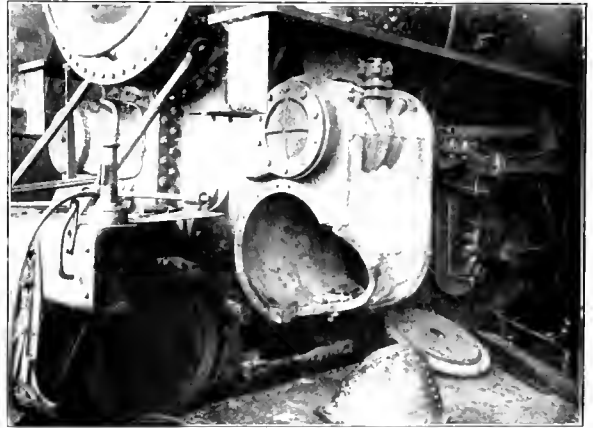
Broken Cylinder Which Was Repaired by Arc Welding
